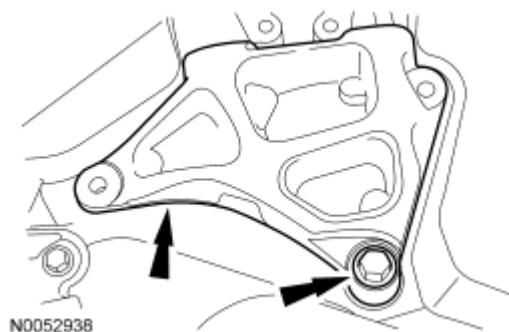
Locating Lower Engine Mount Bracket Bolt
